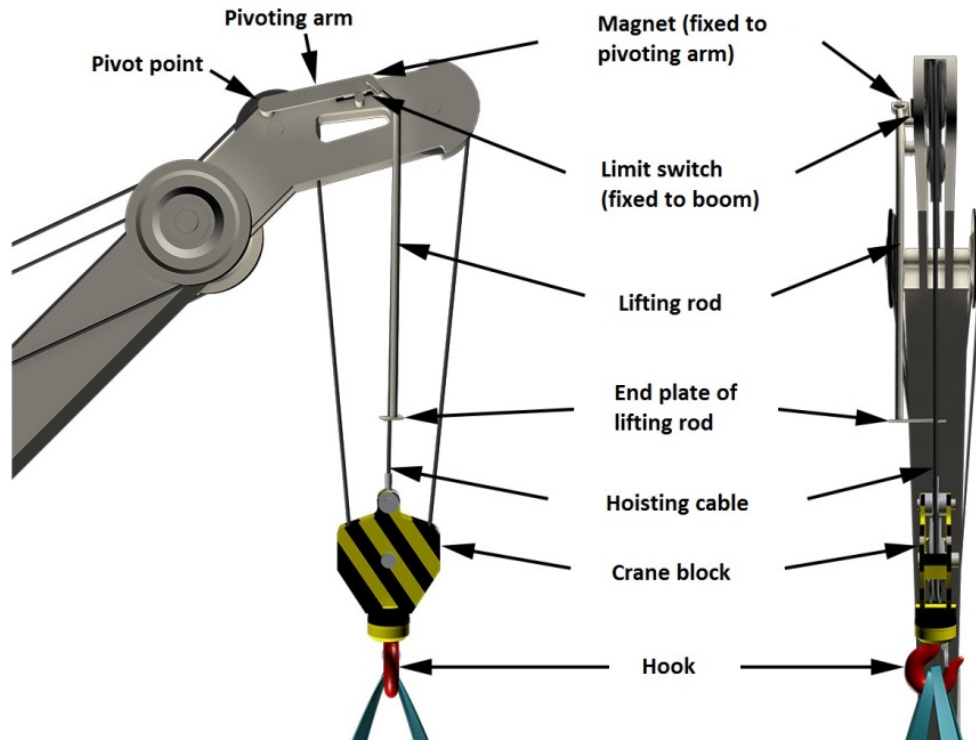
Side view of boom head and limit switch components (left) and front view of boom head (right). See Appendix C for the full view of the port provision crane.
